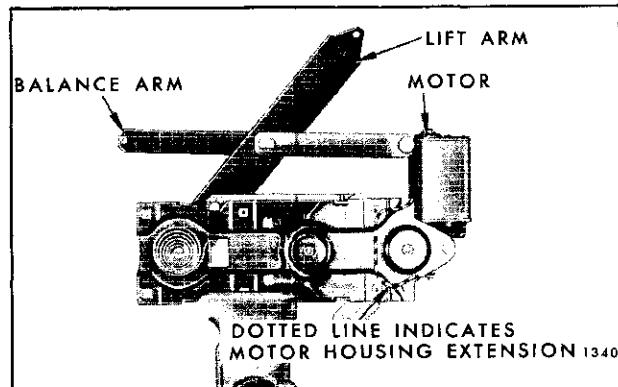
Door Window Regulator and Electric Motor Assembly
